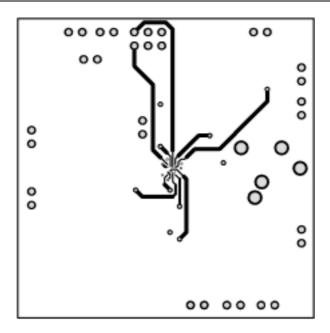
Recommended ITL PCB Layout Inner Layer 1
